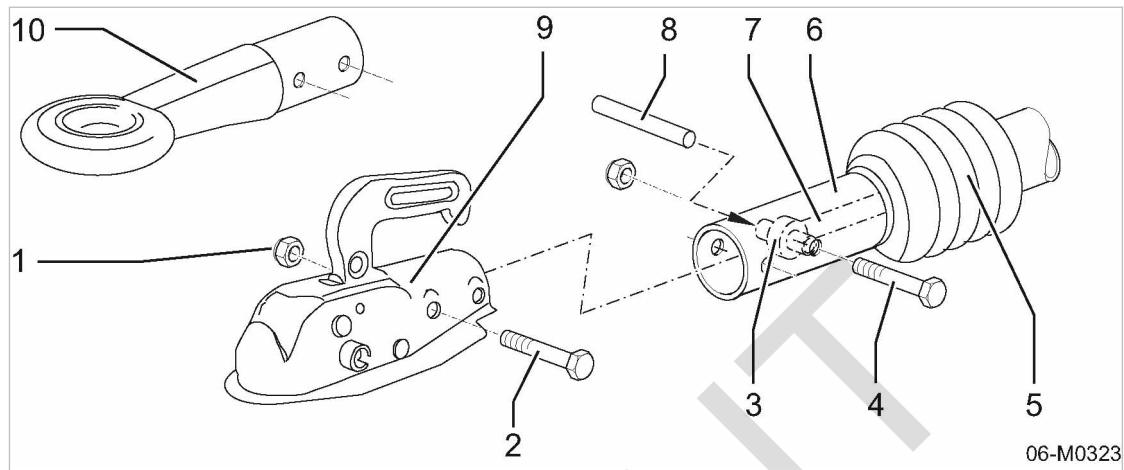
Changing the towing eye (fixed height towbar, USA chassis version)
